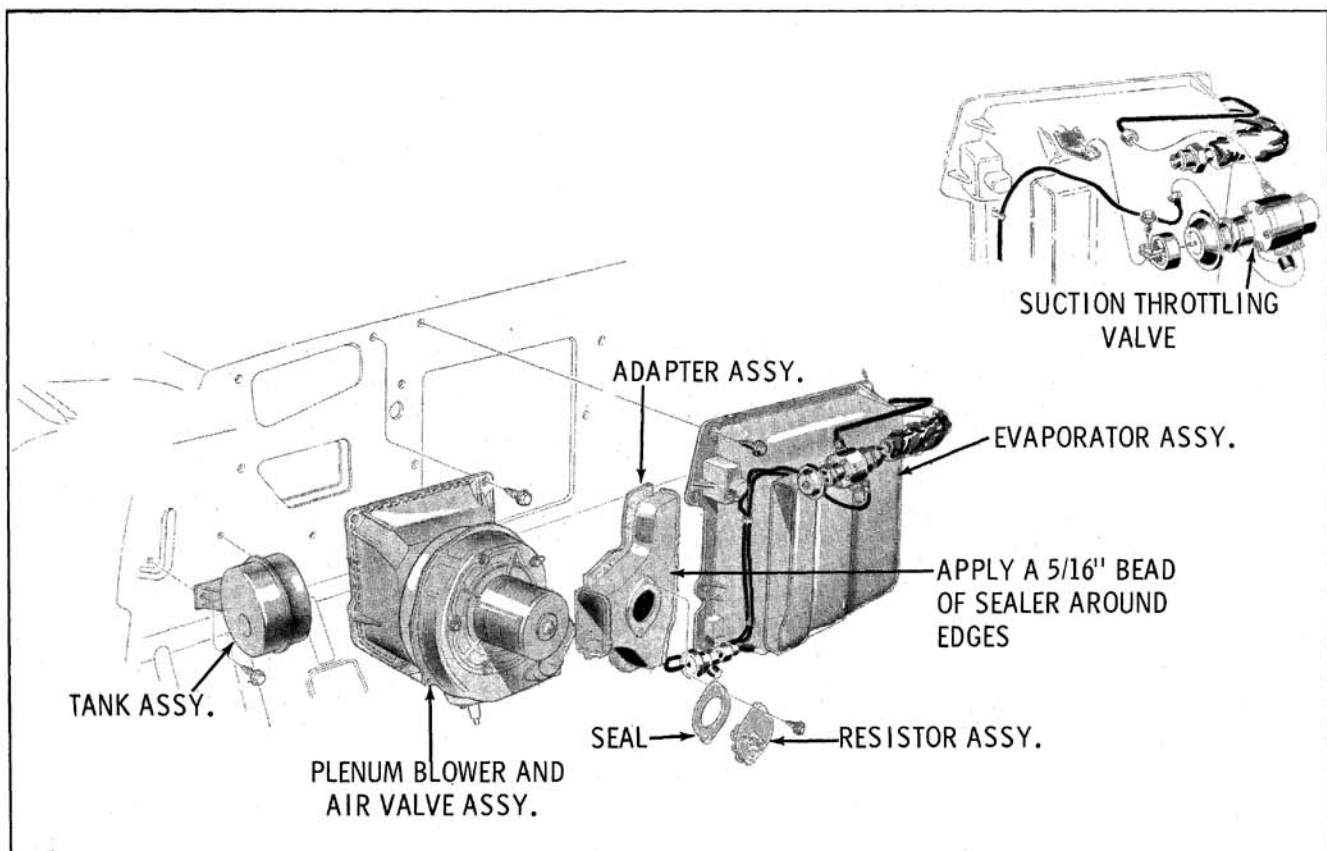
Blower Motor and Evaporator (52 through 86 Series)
